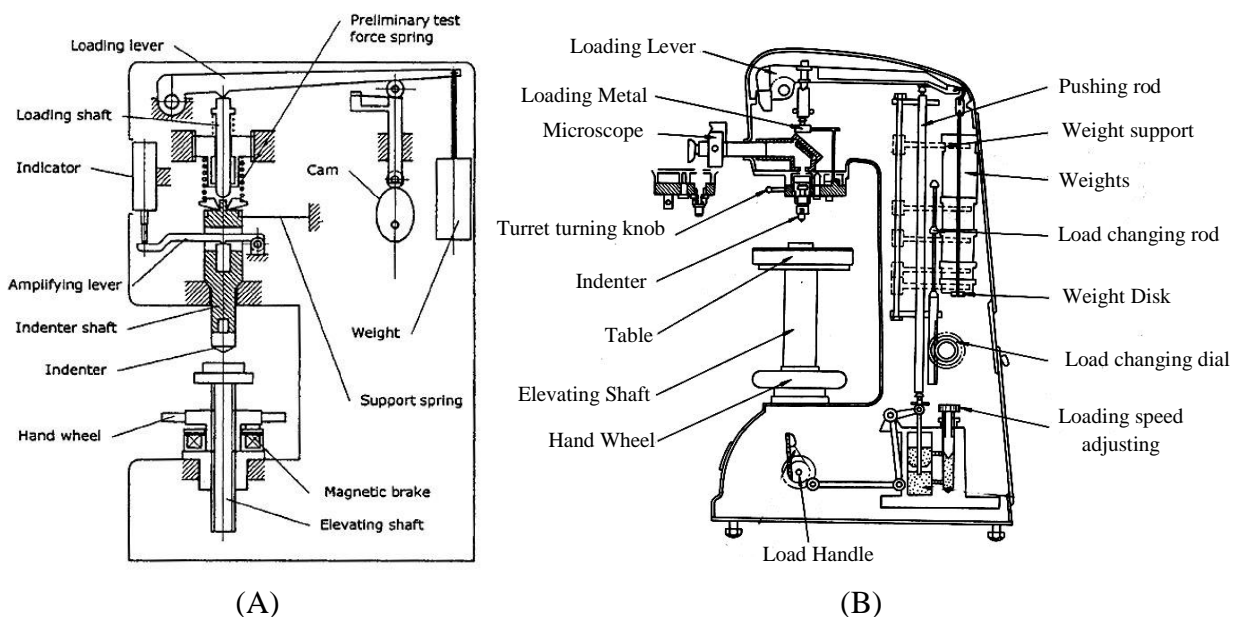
Loading mechanism of (A) Rockwell machine and (B) Vickers machine
